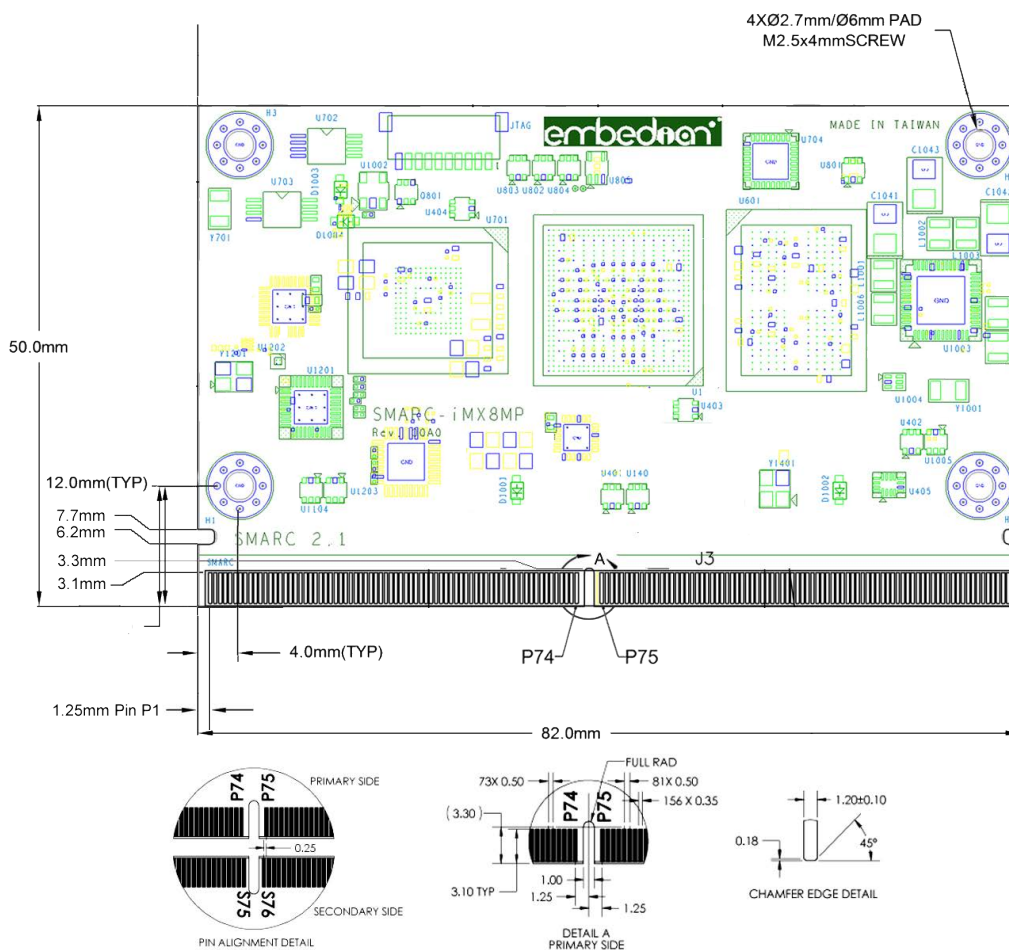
SMARC-iMX8MP Mechanical Drawings (Top View)
